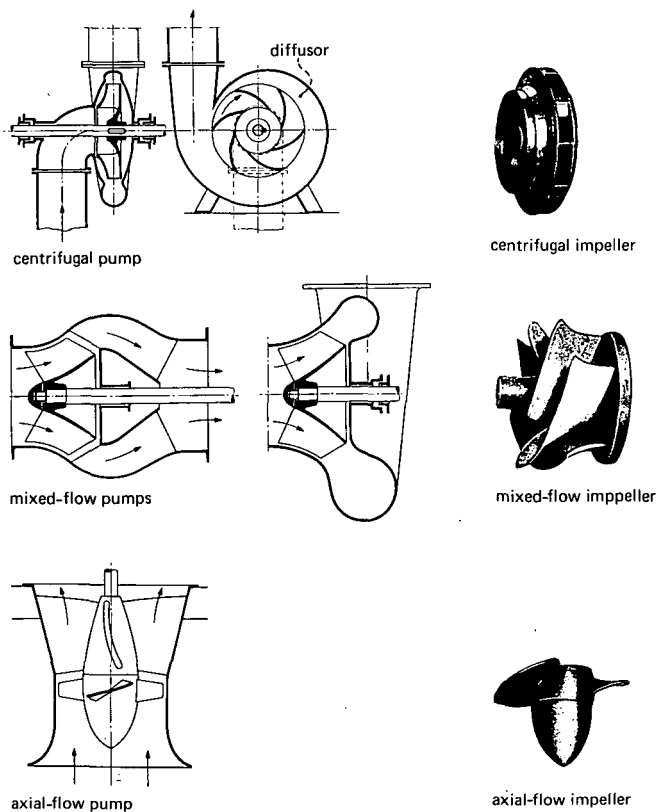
Examples of impeller pumps and impeller shapes (after Lazarkiewics and Troskolanski 1965)
